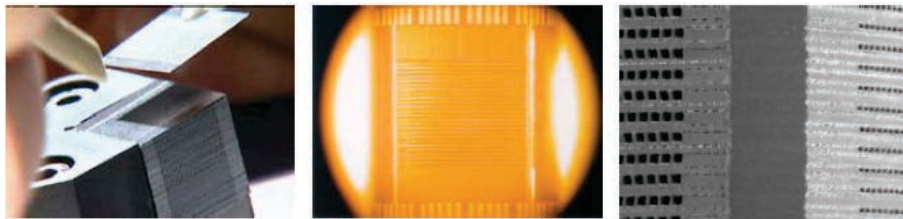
Three steps of the diffusion bonding assembling technique. From the left: stacking of single foils, heating-up and pressing of the foil stack, final monolithic structure [53].
